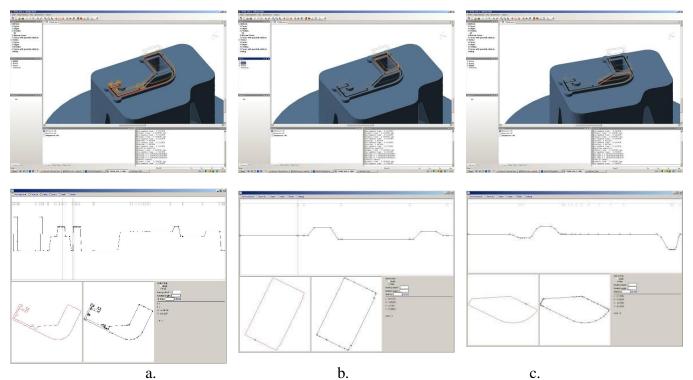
The evolutes of outer (a) and inner (b, c) bearings of hollow angular profile displayed in Bearing Editor.
